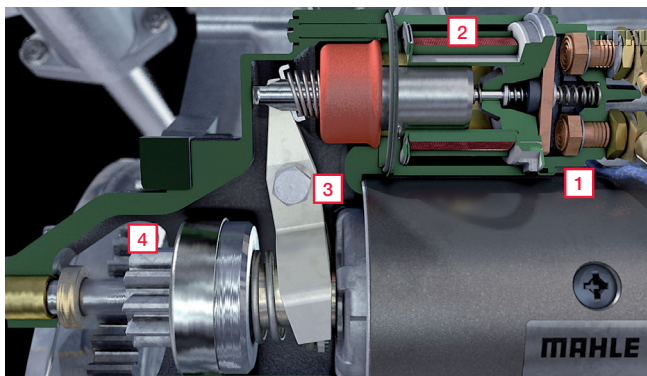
Cross section of starter motor with contact bridge (1), solenoid (2), engaging lever (3), and pinion with free-wheel clutch (4)
